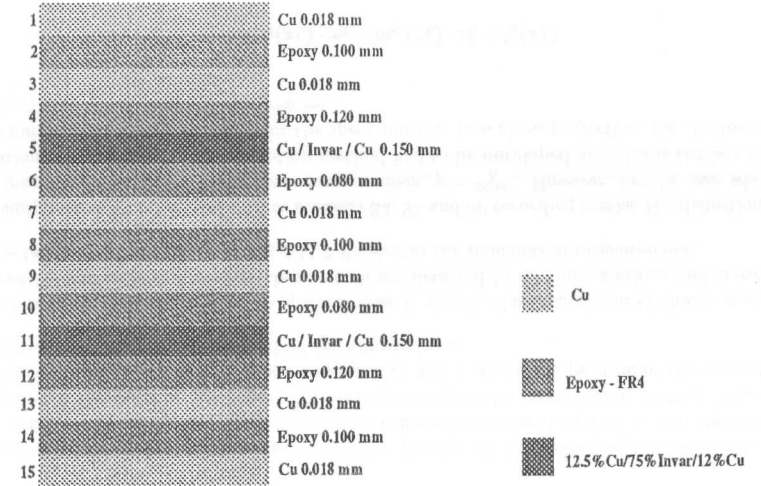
Layer structure inside the multi-layer hybrid PCB
